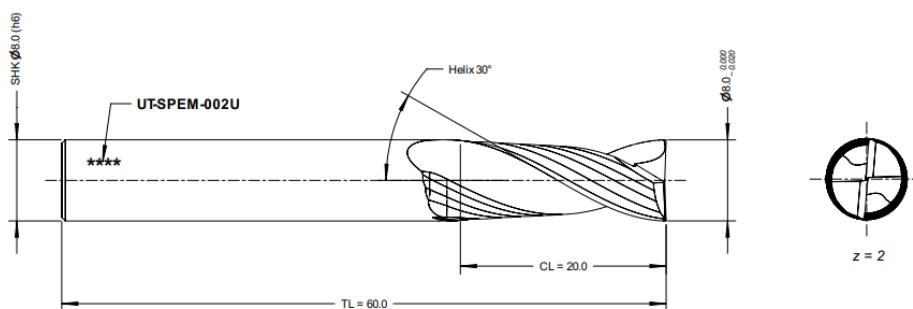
Drawing of end mill carbide with diameter 8mm, 2 flutes and helix angle 30°
